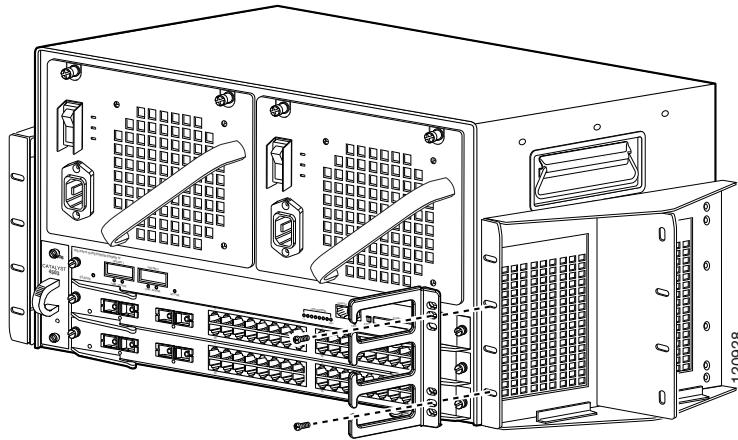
Attaching the Cable Guide to the Catalyst 4506 Switch
